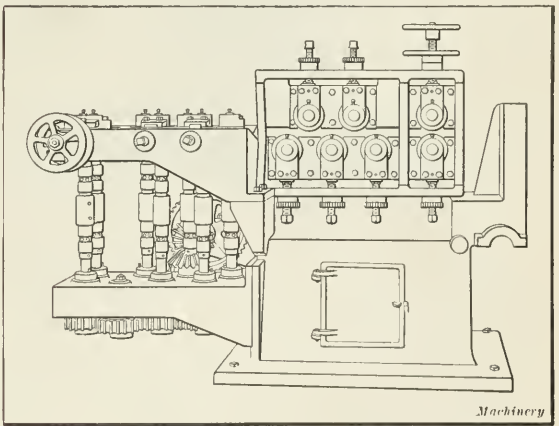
All-gear, Adjustable-roll, Heavy Wire Straightener
